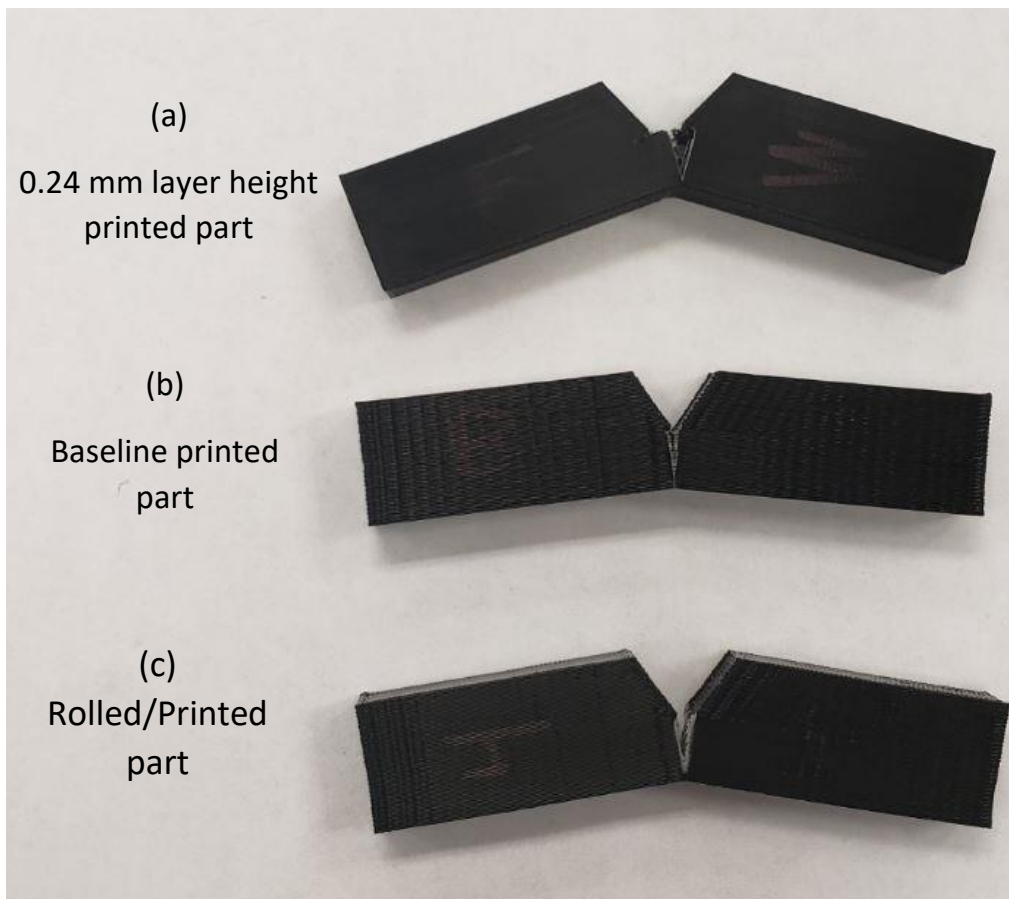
Fracture surface and propagation line for (a) 0.24 mm layer height part. (b) Baseline printed part. (c) Rolled/printed part.
